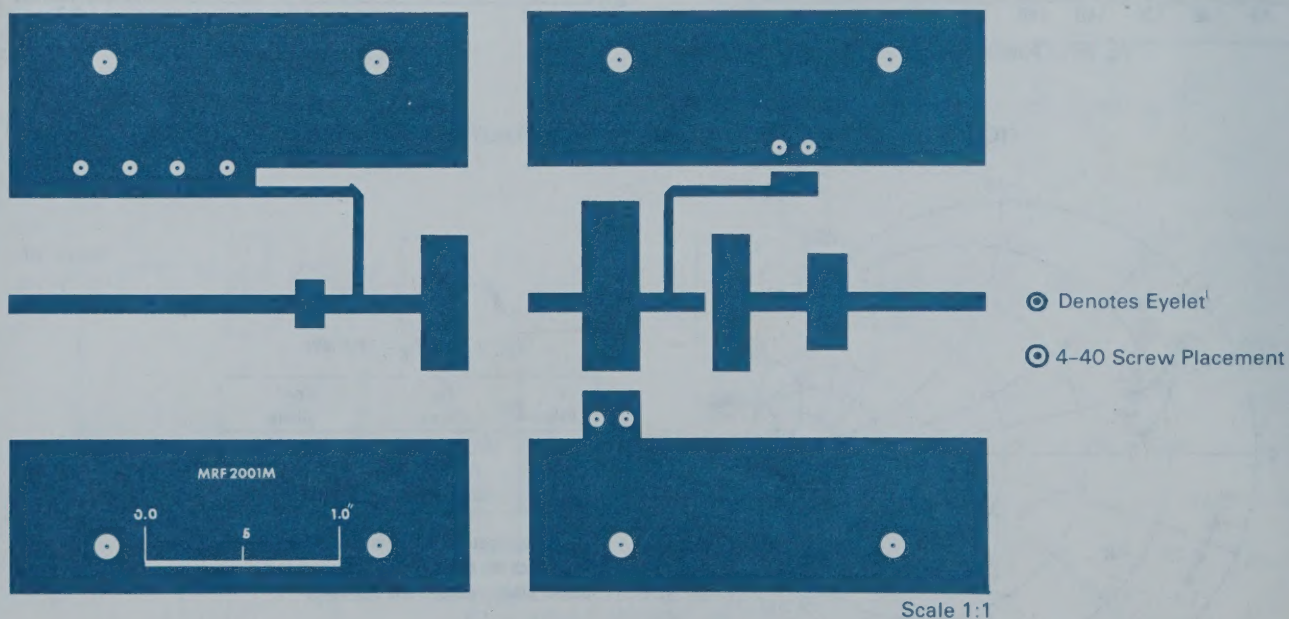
PRINTED CIRCUIT BOARD LAYOUT — 2.0 GHz TEST CIRCUIT
